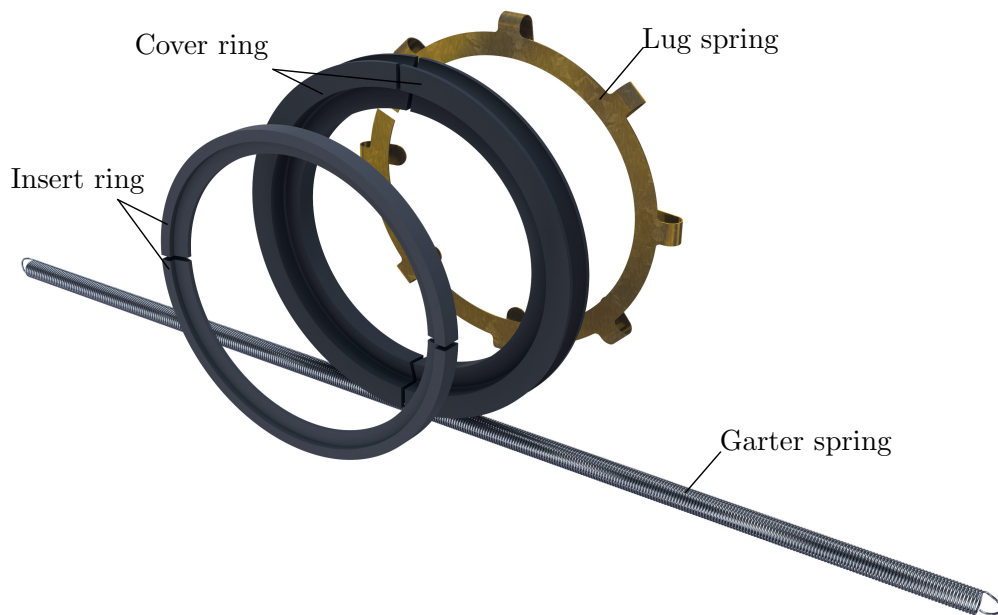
Structure of the OFD wiper assembly showing the manufacturing components
